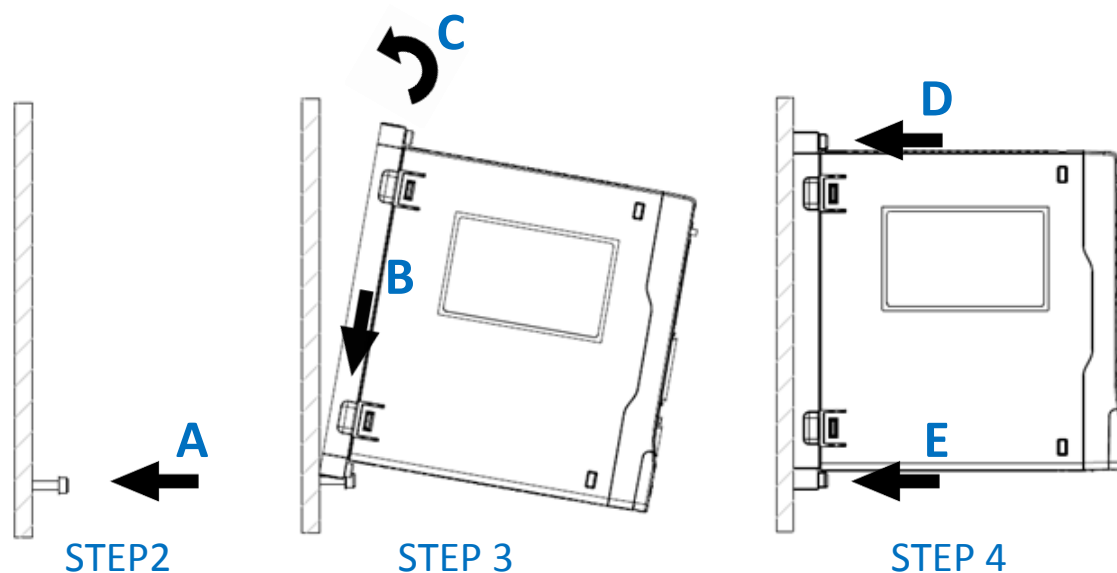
Mechanical Mounting of AMD2000 D2103 Servo Drive
